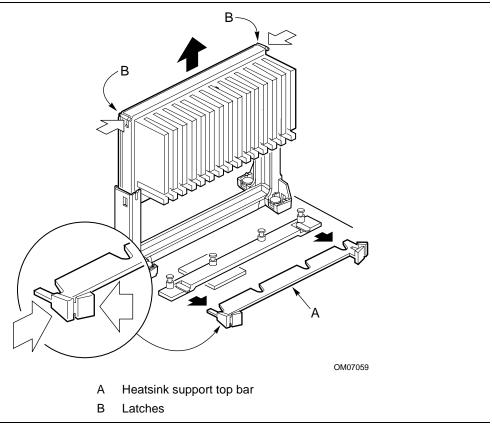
Removing the Heatsink Support Top Bar and the Processor
